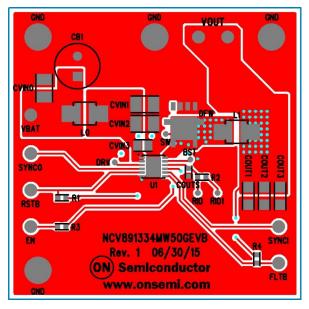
NCV891334MW50GEVB PCB Layout - Top
